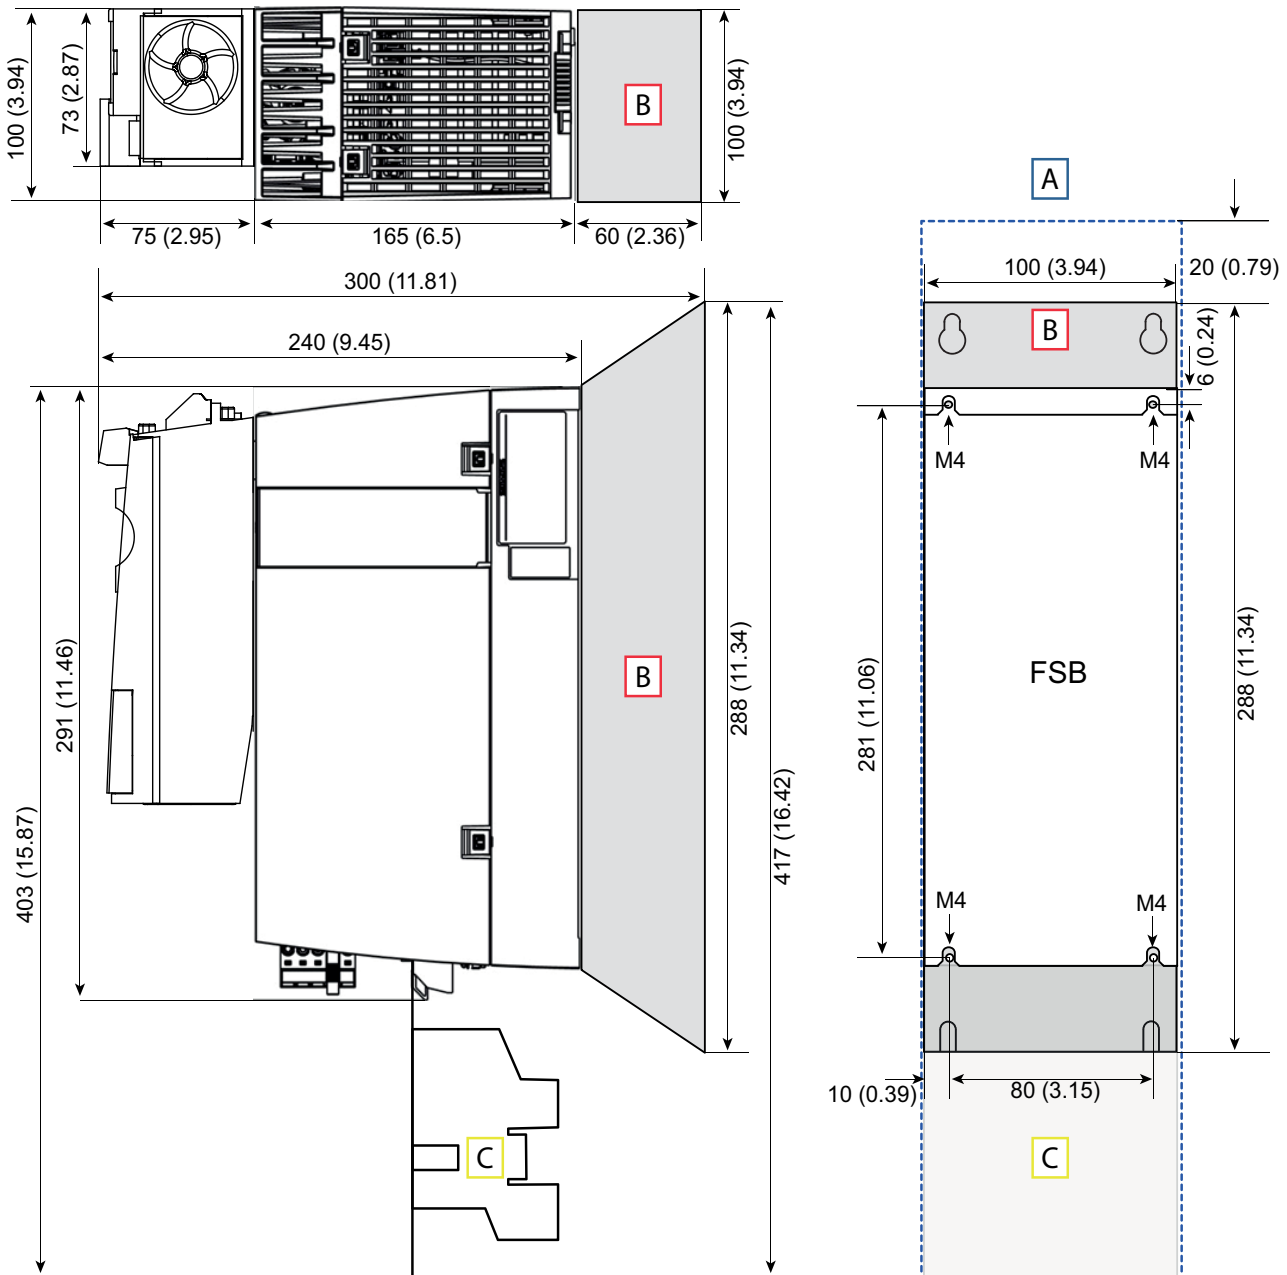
Dimensions of Power Module PM240-2; frame size FSB
